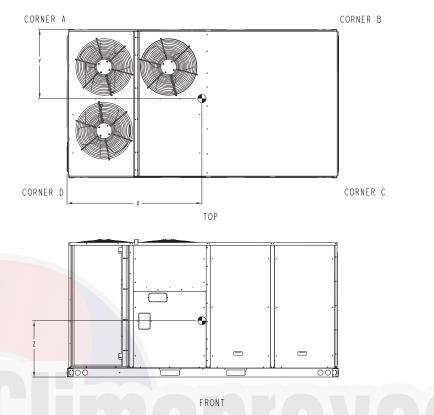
Unit Dimensional Drawing - Size 14 Unit (cont.)
